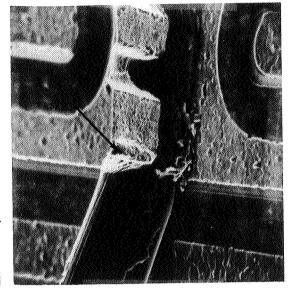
Manufacturer "B" 2N2222A, Serial Number 74, Base Post Bond, Ultrasonic. Open at The Heel After 16, 200 Power Cycles.
